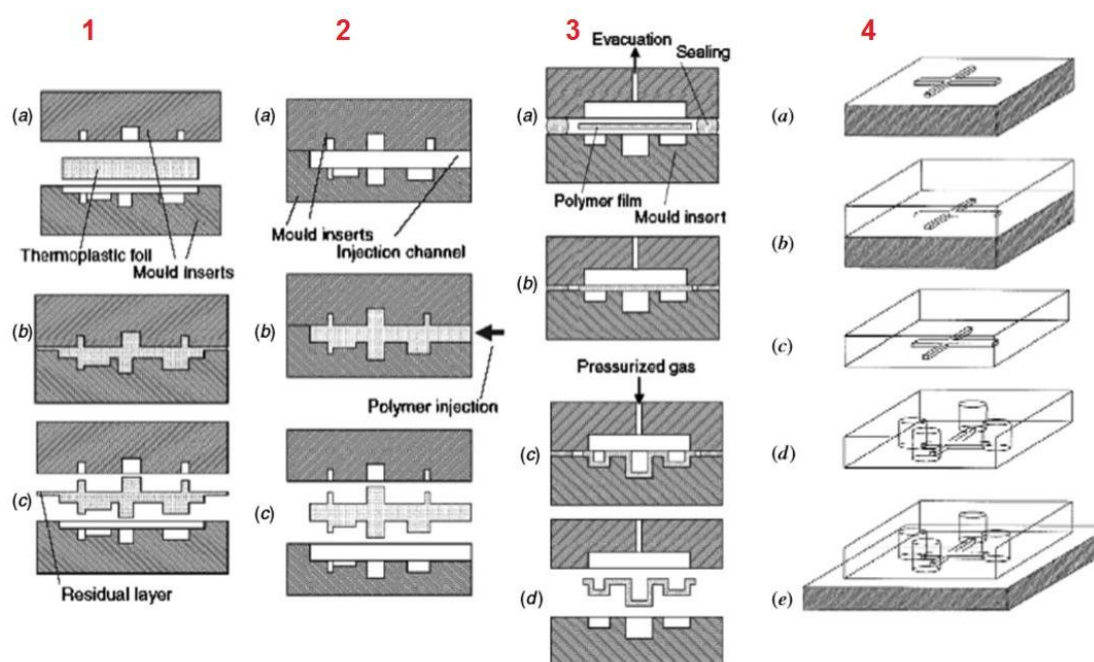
(1) Embossing, (2) injection moulding, (3) thermoforming and (4) PDMS casting process
